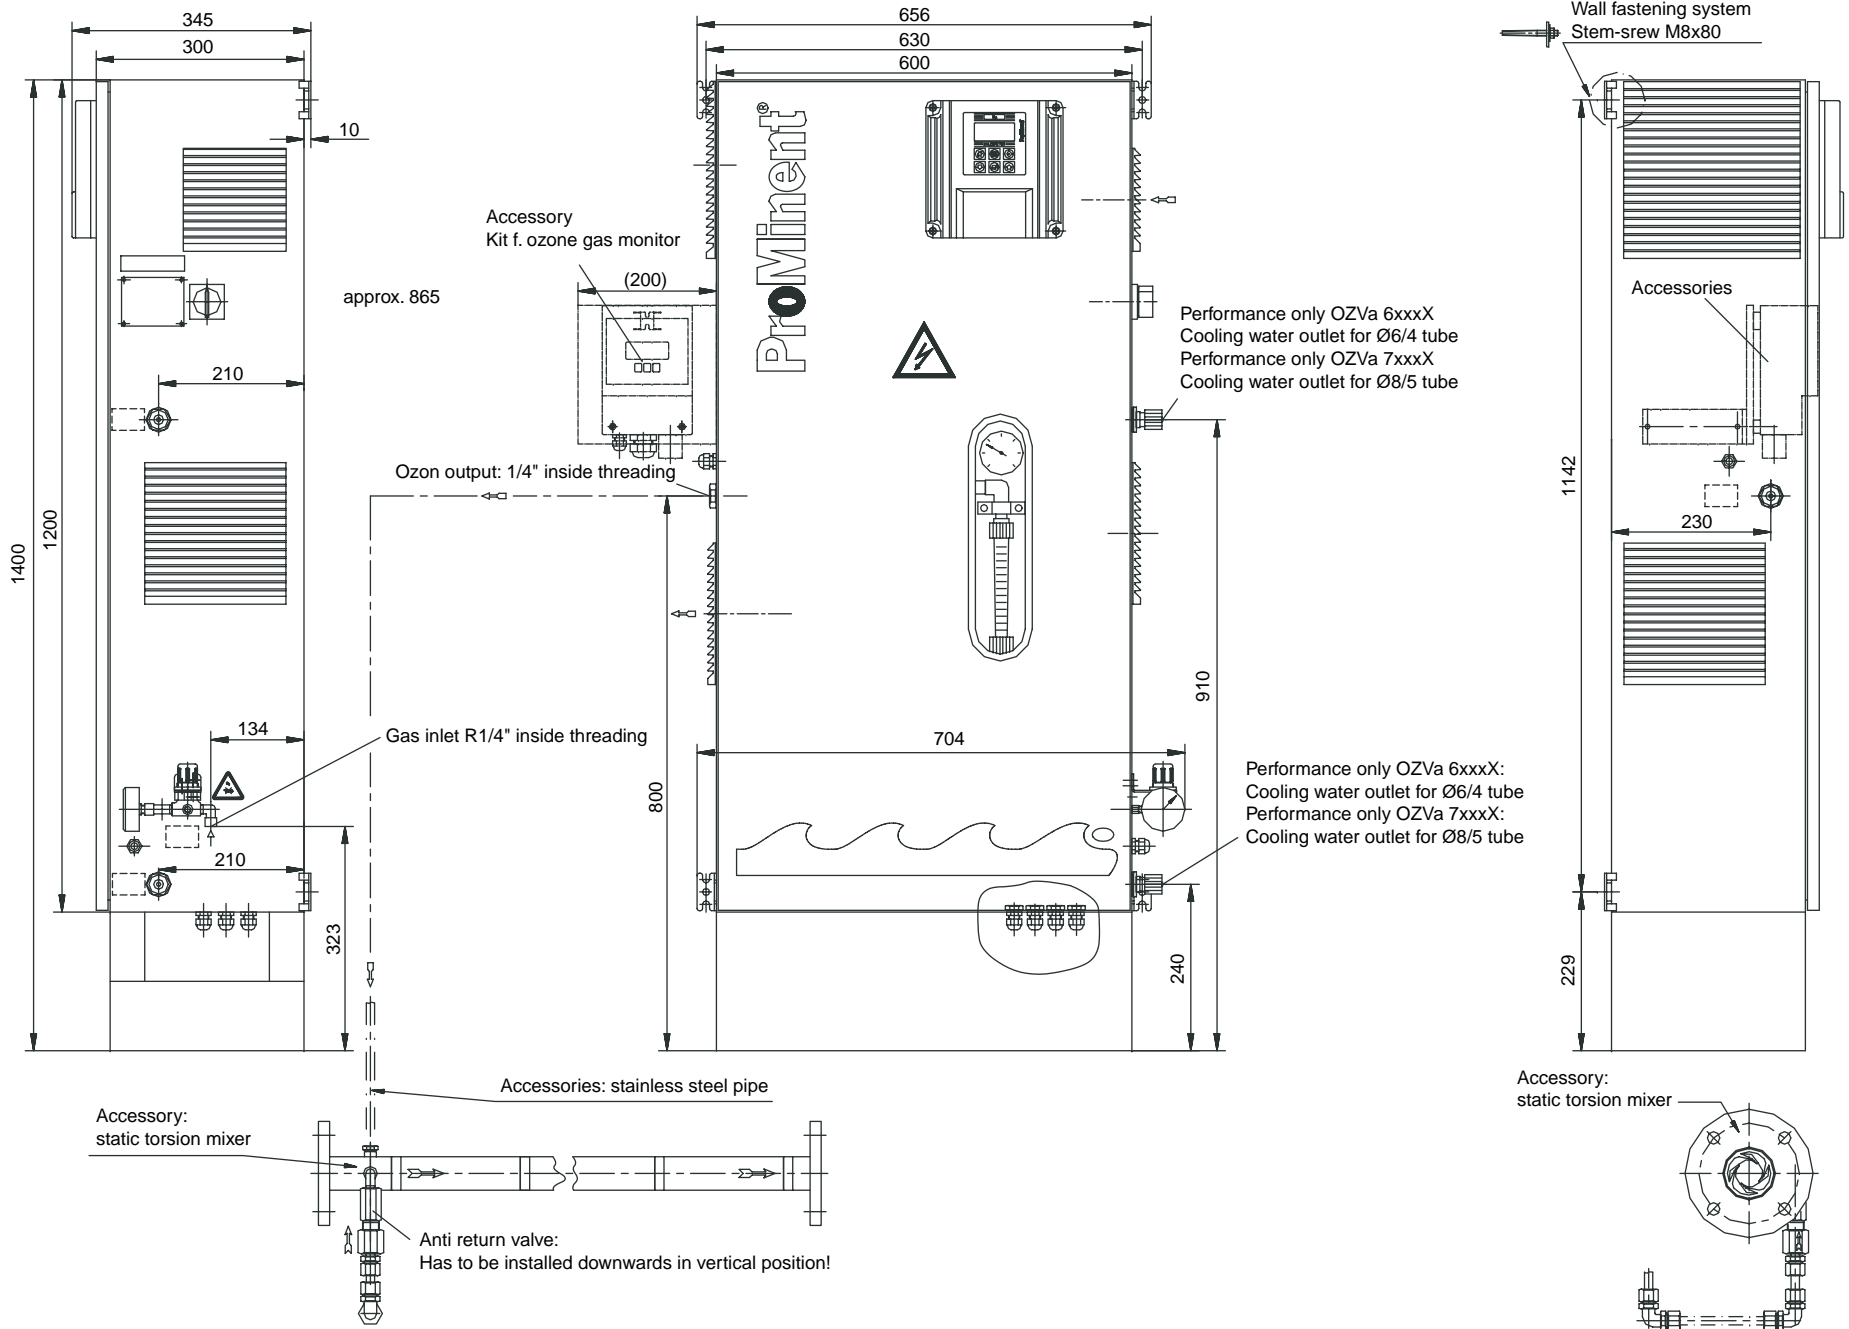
Dimension sheet OZONFILT® OZ/Va 5
